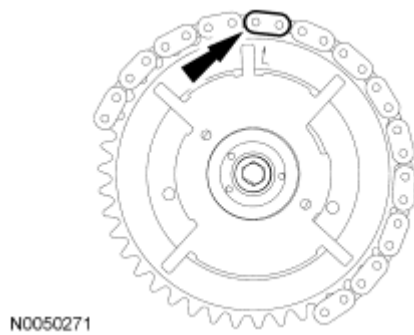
Locating Camshaft Sprocket Timing Copper Mark
